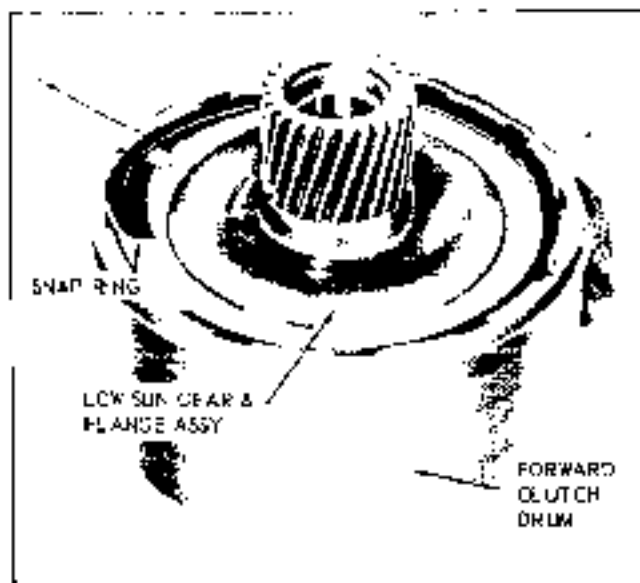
F-43 Removing Low Sun Gear and Flange Assembly Snap Ring
